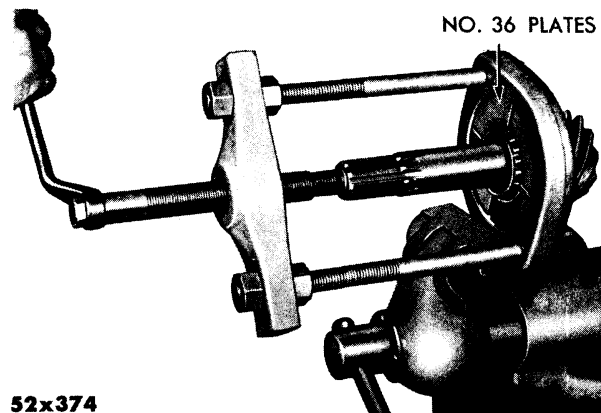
Removing Pinion Bearing from Shaft (Puller C-293-F2)
